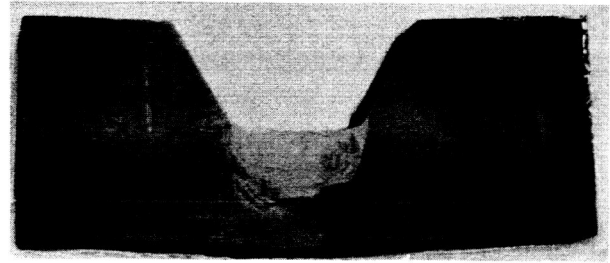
TYPICAL COLD WELD METAL DEFECTS.
